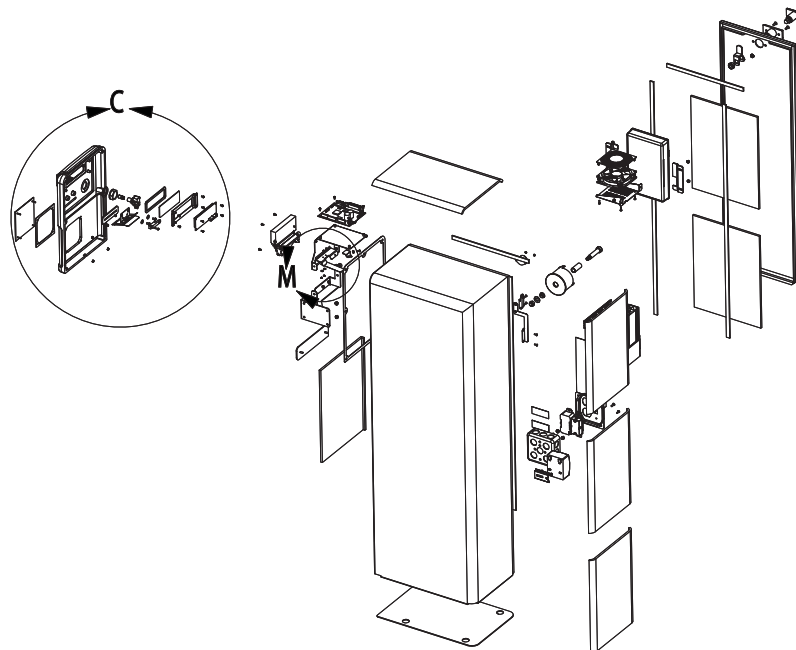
Barcode Ticket Dispenser (120VAC) Drawing, Detail C
